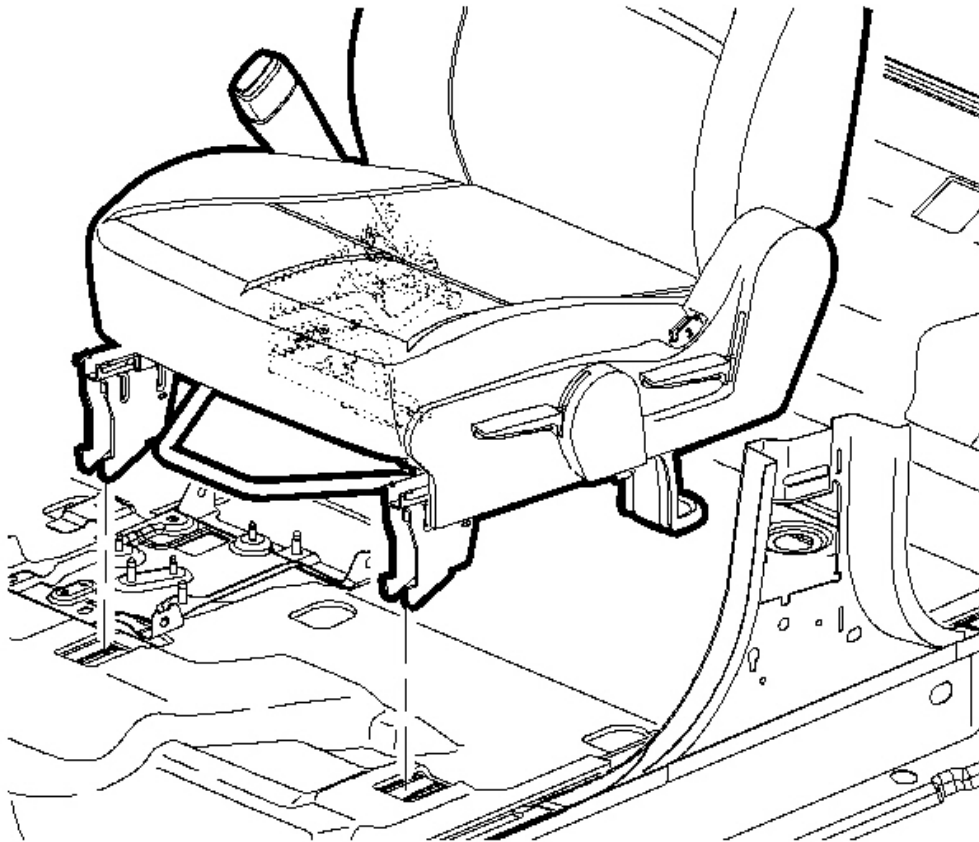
Positioning Seat In Vehicle & Engaging The Front Adjuster Hooks
